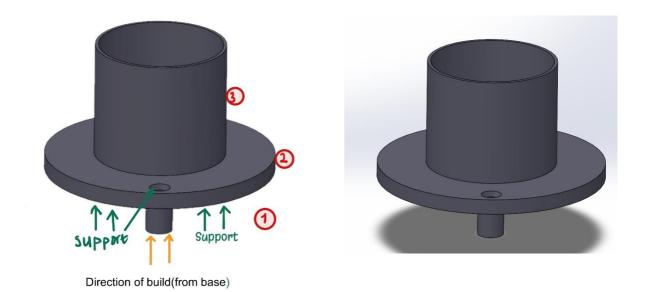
Input Adapter part with 3D printing layer details, support structure details and showing the isometric view of the part .
